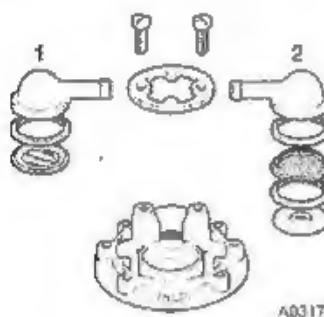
The valve assembly, type AUF200/AZX1200 pump.
